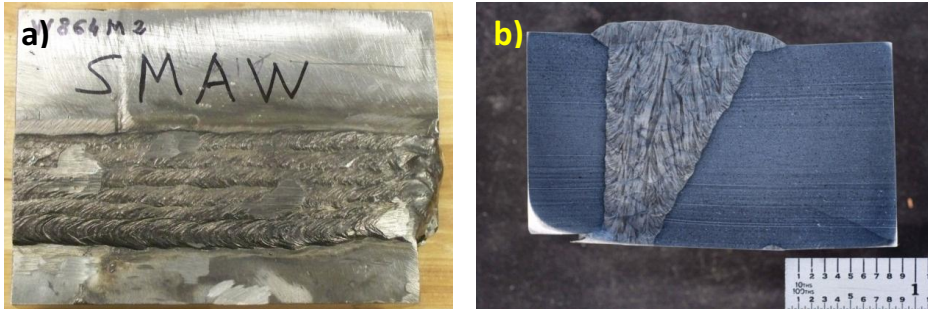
Views of the sample CIEMAT SMAW: a) broad weld from above and b) the final sample that has been cut transverse from the weld.
